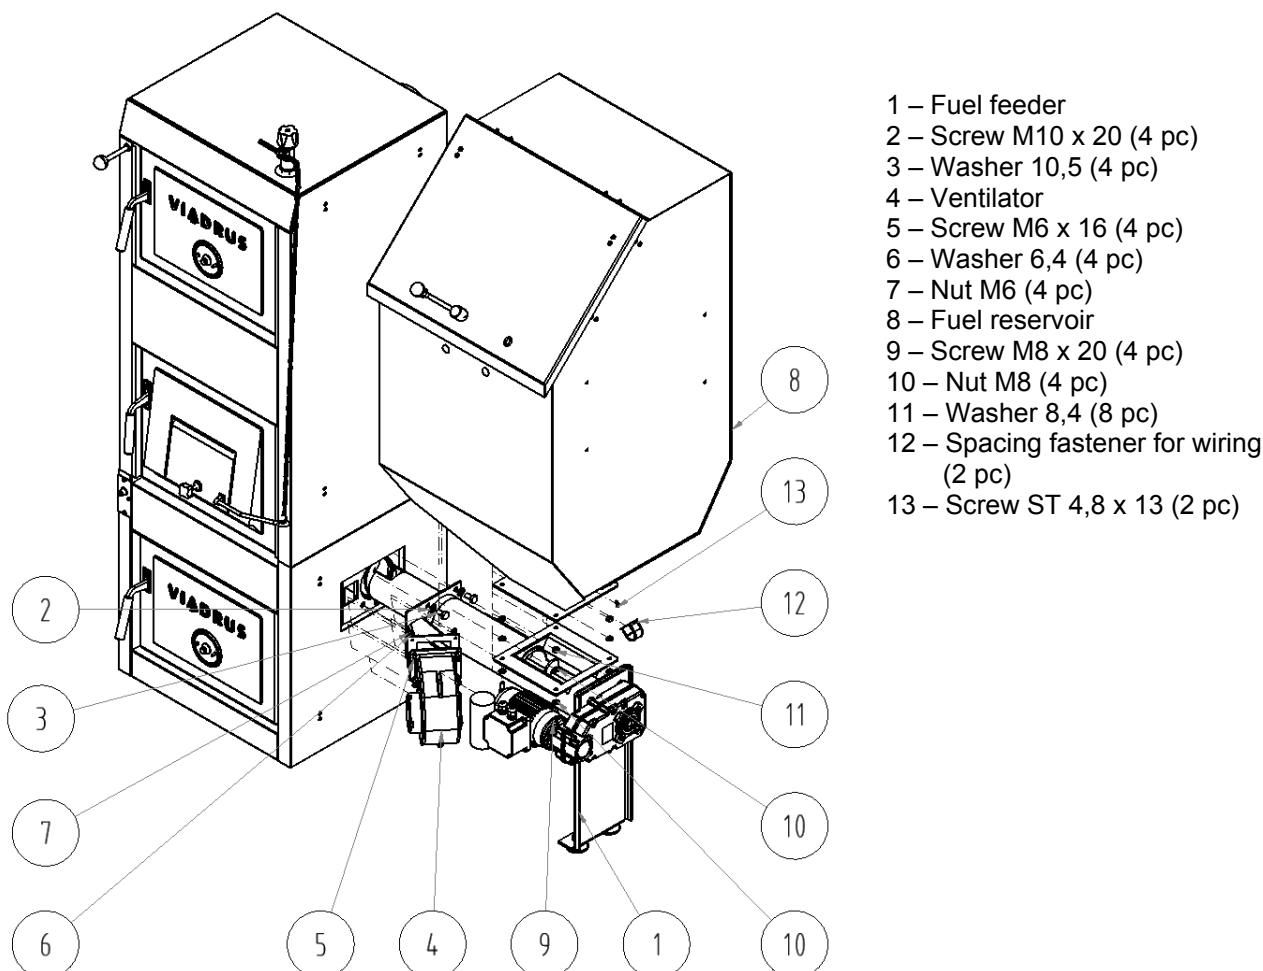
Mounting of fuel feeder and reservoir to the boiler
